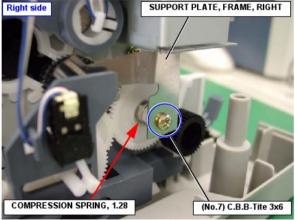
SUPPORT PLATE, FRAME, RIGHT Removal
